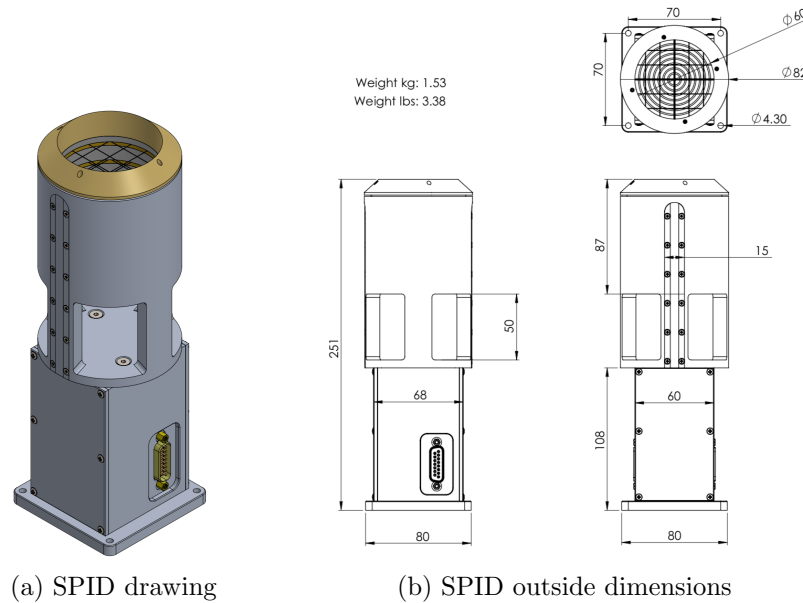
SPID probe 3D drawing and outside dimensions. Drawing from Solidworks by UIT/Sveinung Olsen
